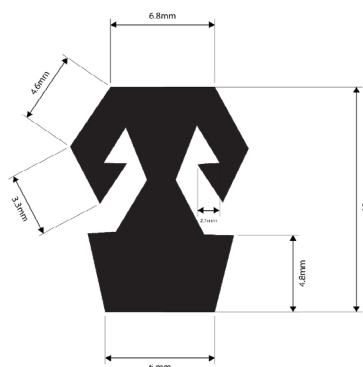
Experimental Textile Surface Design with 3D Printer-II, Technical Drawing, Serhat Güven, 2025
